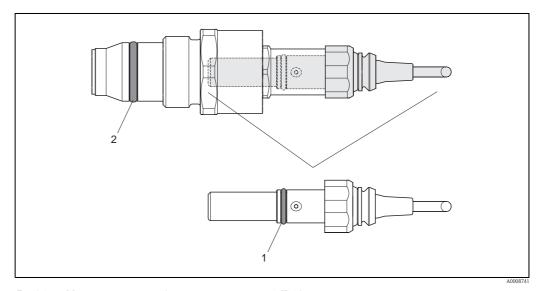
Mounting instructions for sensor connectors with IP 68 protection
